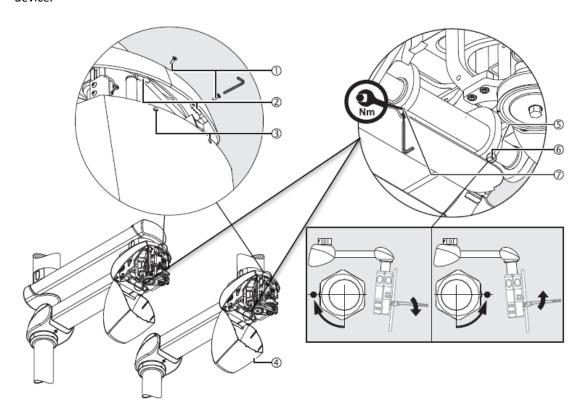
Adjusting the load capacity of the motor arm and closing the rear bottom cover
